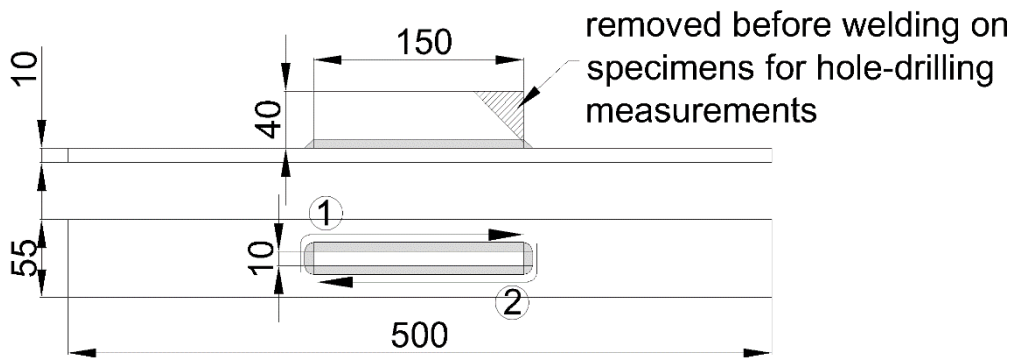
Longitudinal stiffener specimens, welding sequence indicated by ① and ②.
